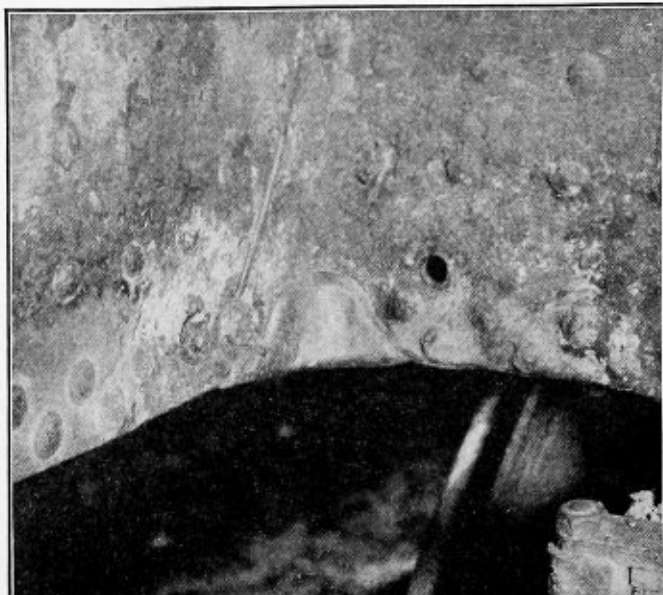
SHOWING THE INSIDE OF THE FIRE-BOX WHERE THE MUD RING WAS WELDED
